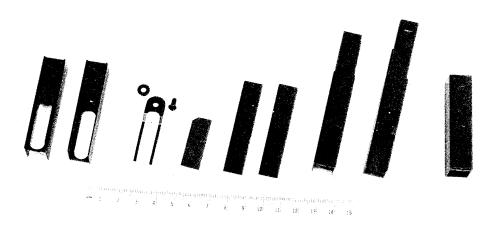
Filter holder with removable shutters. From left to right: front and rear view of the holder body provided with dove-tail grooves; retaining spring with nylon screw and washer; Schott NG glass filter; two shutters; front view of the filter holder with front shutter, rear view of the filter with rear shutter; filter holder with both shutters closed.
